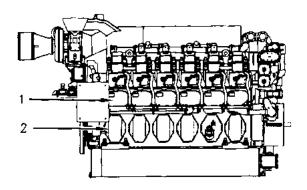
Right Side of Engine (1) Covers (for the camshaft). (2) Covers (for the inspection of the connecting rod bearings and the main bearings.
